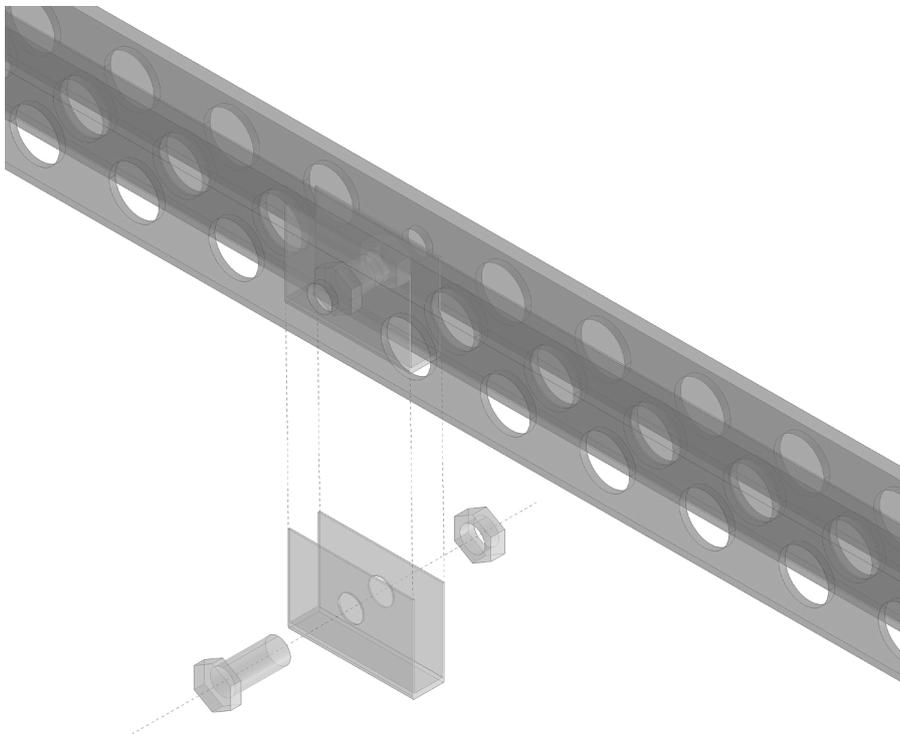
Connecting frames - bolt and nut fixture
